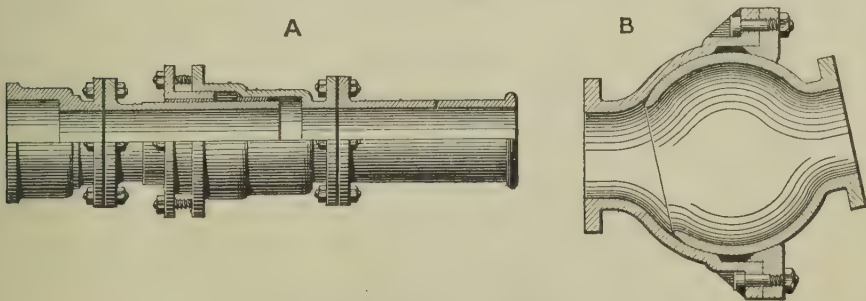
A, Expansion Joint; B, Ball-and-socket Joint
